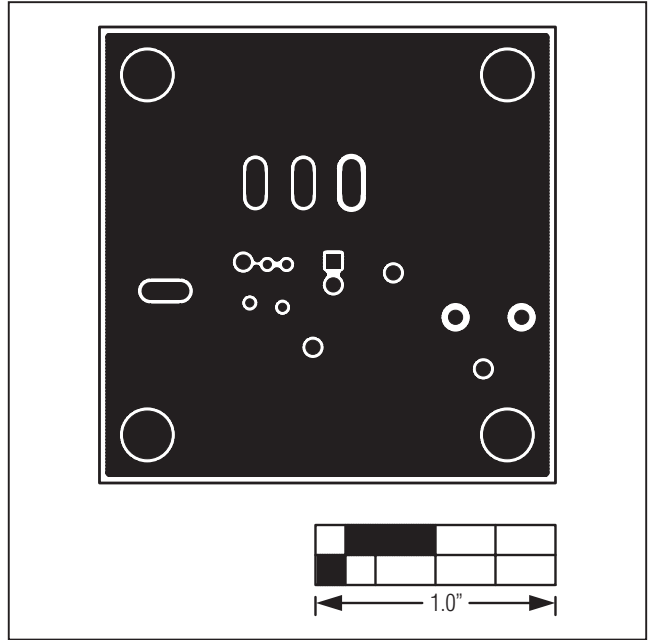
MAX97200A EV Kit PCB Layout—Solder Side
